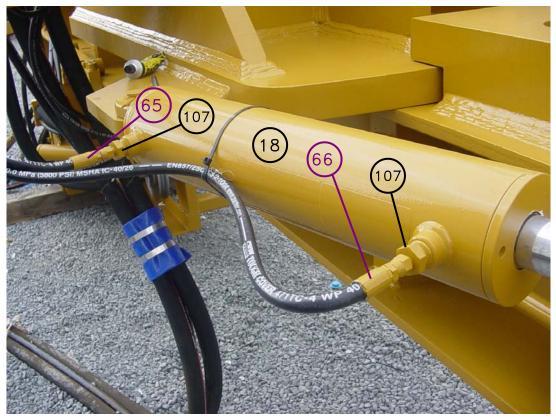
RIGHT-HAND SIDE SHOWING TILT CYLINDER
